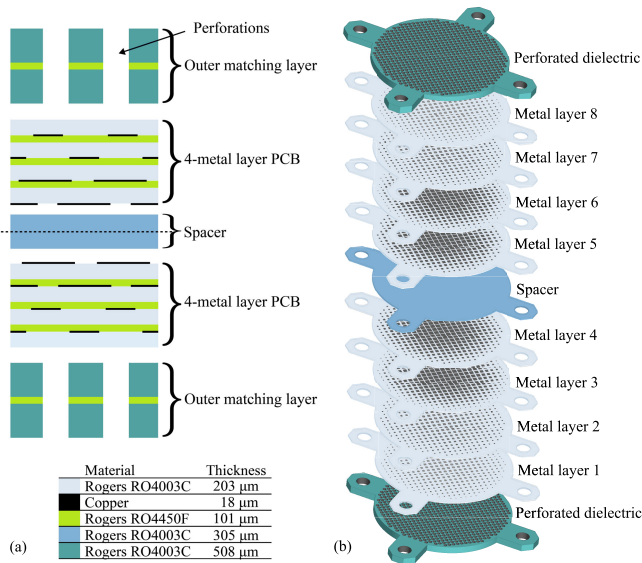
(a) Exploded view of the lens layers and (b) detailed stackup with used materials. The lens is composed of two four-layer PCBs, separated by a spacer, and perforated dielectrics above and below as outer matching layers.
